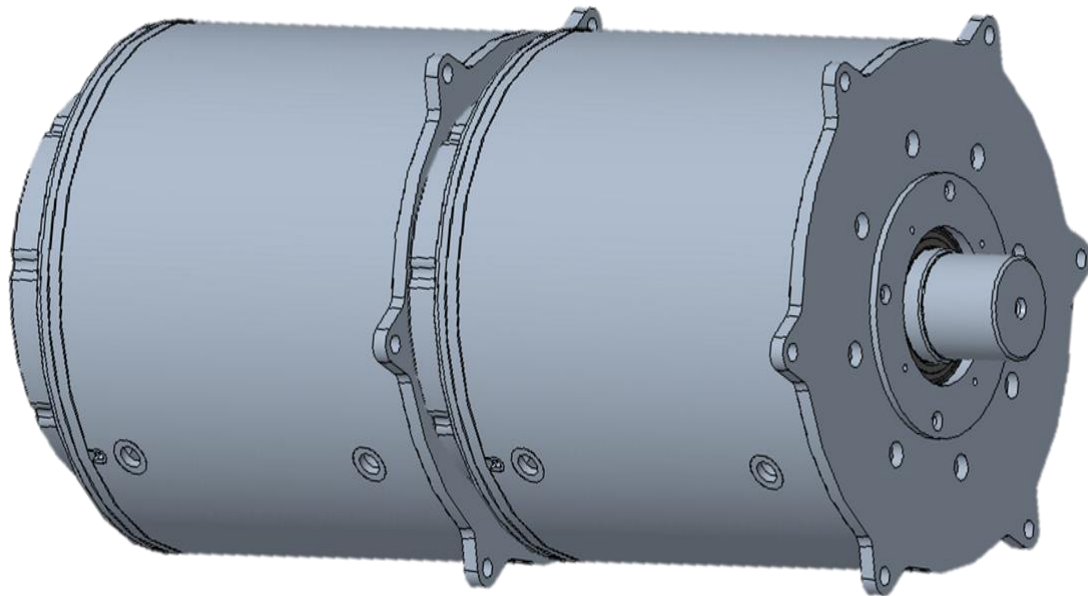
Mechanical design of the secondary electric machine with housing, rotor shaft and propeller [119]
